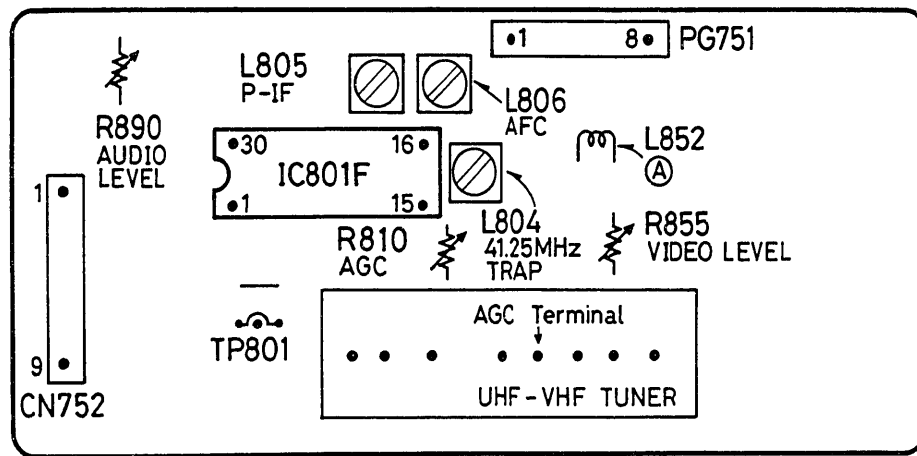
Tuner/IF PACK P.C. Board (Parts side)
